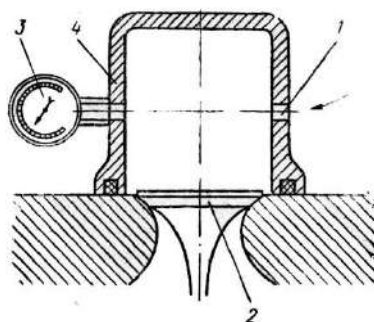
Checking valve tightness with pneumatic device: 1 – opening for compressed air supply; 2 – valve; 3 – pressure gauge; 4 – device cartridge
